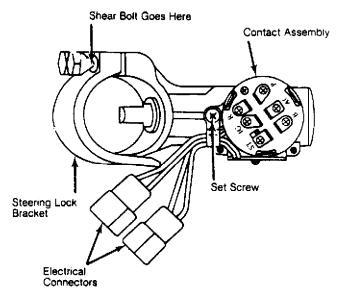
Exploded View of Ignition Switch (Exc. Pickups)
